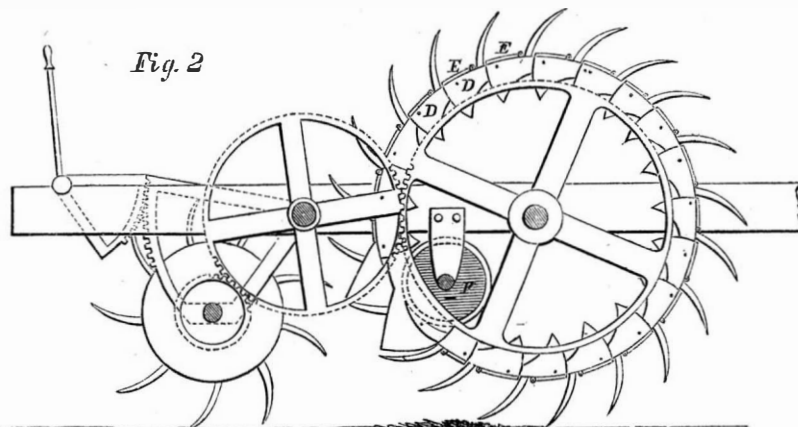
of the annexed cuts represents a perspective view of the machine, propelled by steam, and Fig. 2 is a longitudinal vertical section of the principal parts. To the axle of the large supporting wheels, A A, is
